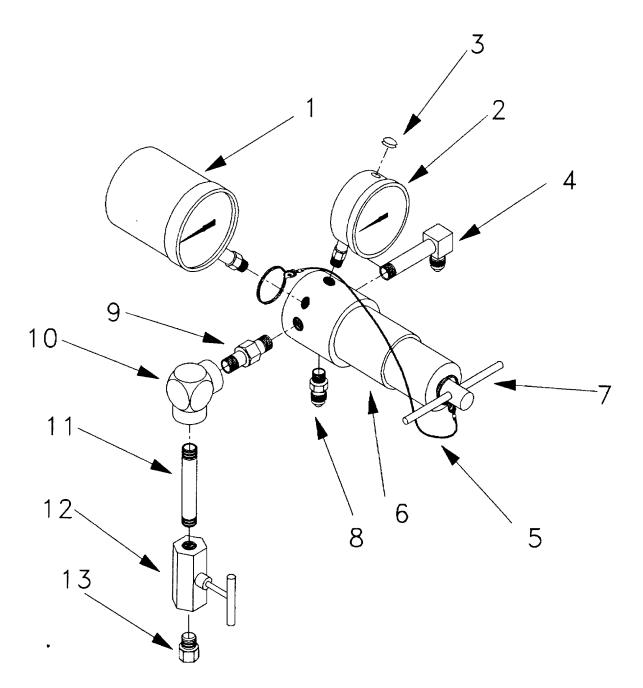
HIGH PRESSURE REGULATOR ASSEMBLY (PA006)
